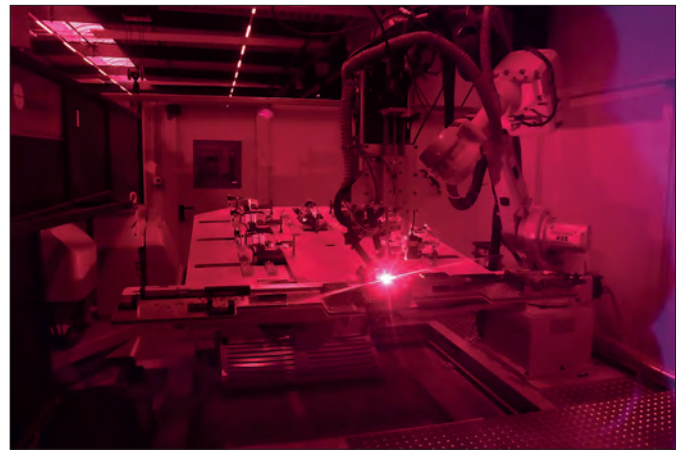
Automated welding process in anode production at JL Goslar Anoden GmbH
